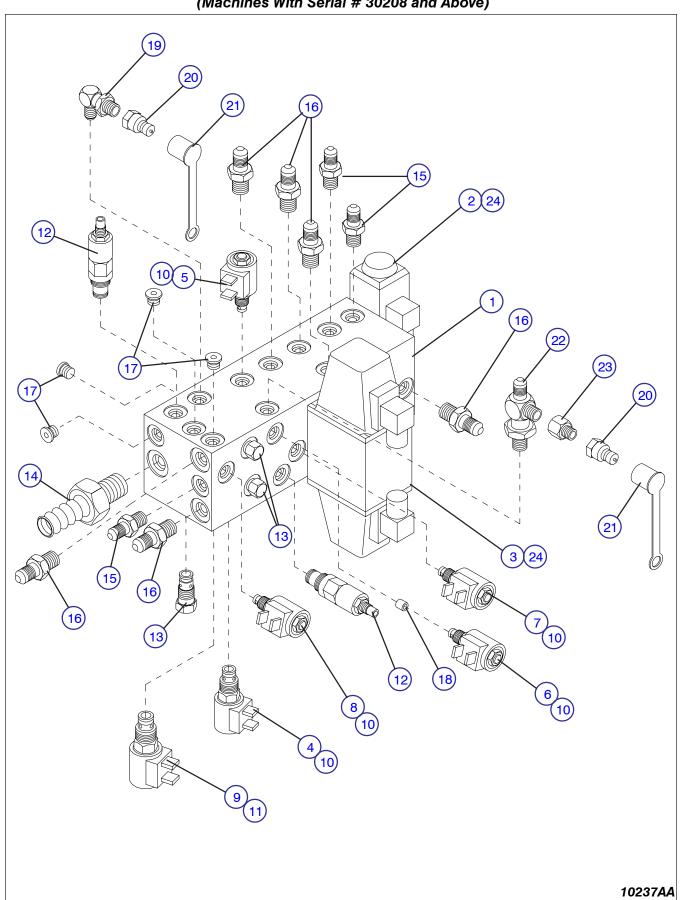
MAIN MANIFOLD ASSEMBLY (Machines With Serial # 30208 and Above)
